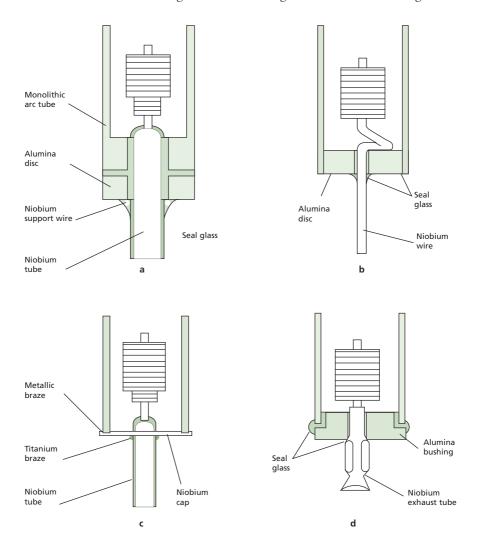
Types of arc tube seal in high pressure sodium lamps
